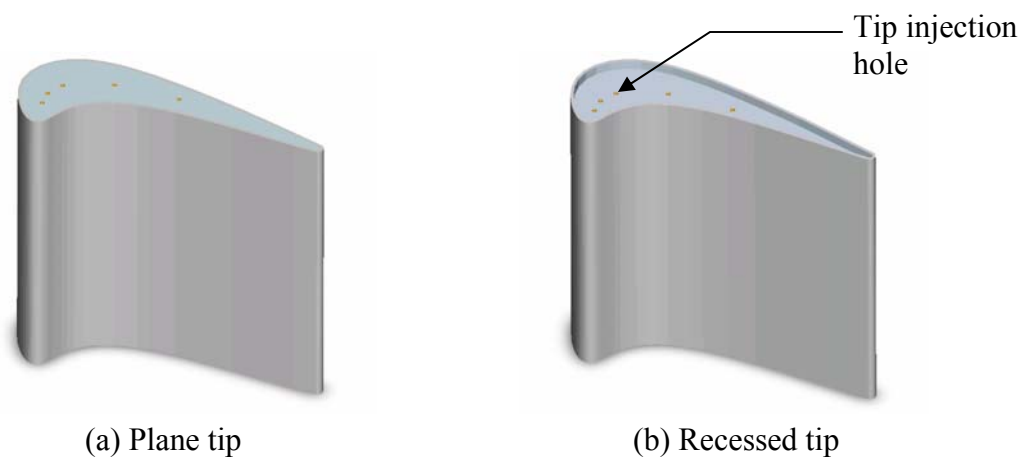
Plane and recessed tip blade with tip coolant injection holes
